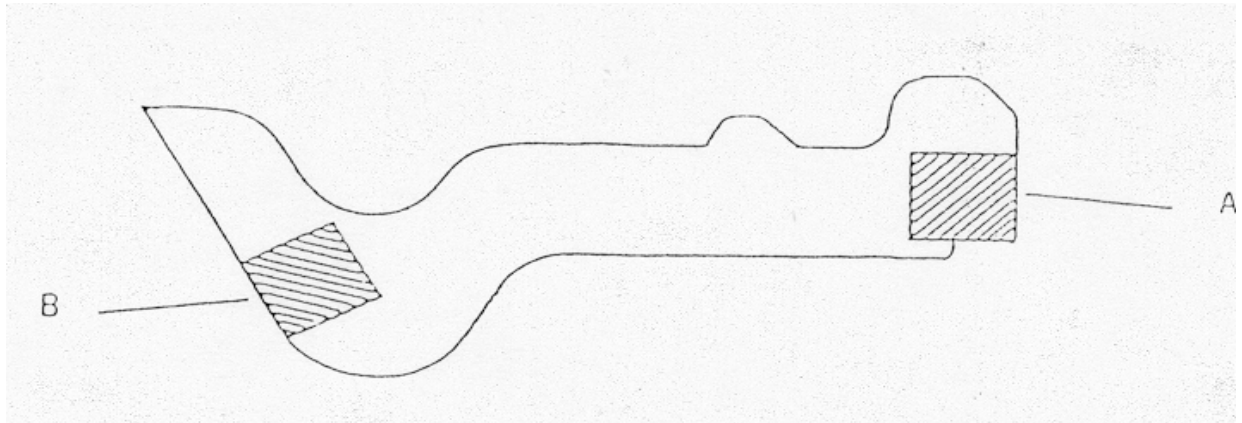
Angle guide plate: removal positions A and B for test specimens for the impact strength test (DIN EN ISO 179-1). When performing the test, the unmachined side of the test specimens is to be placed in the tensile zone. The test specimens for the test of tensile modulus of elasticity shall also be taken from the areas around A and B (DIN EN 527-2)
